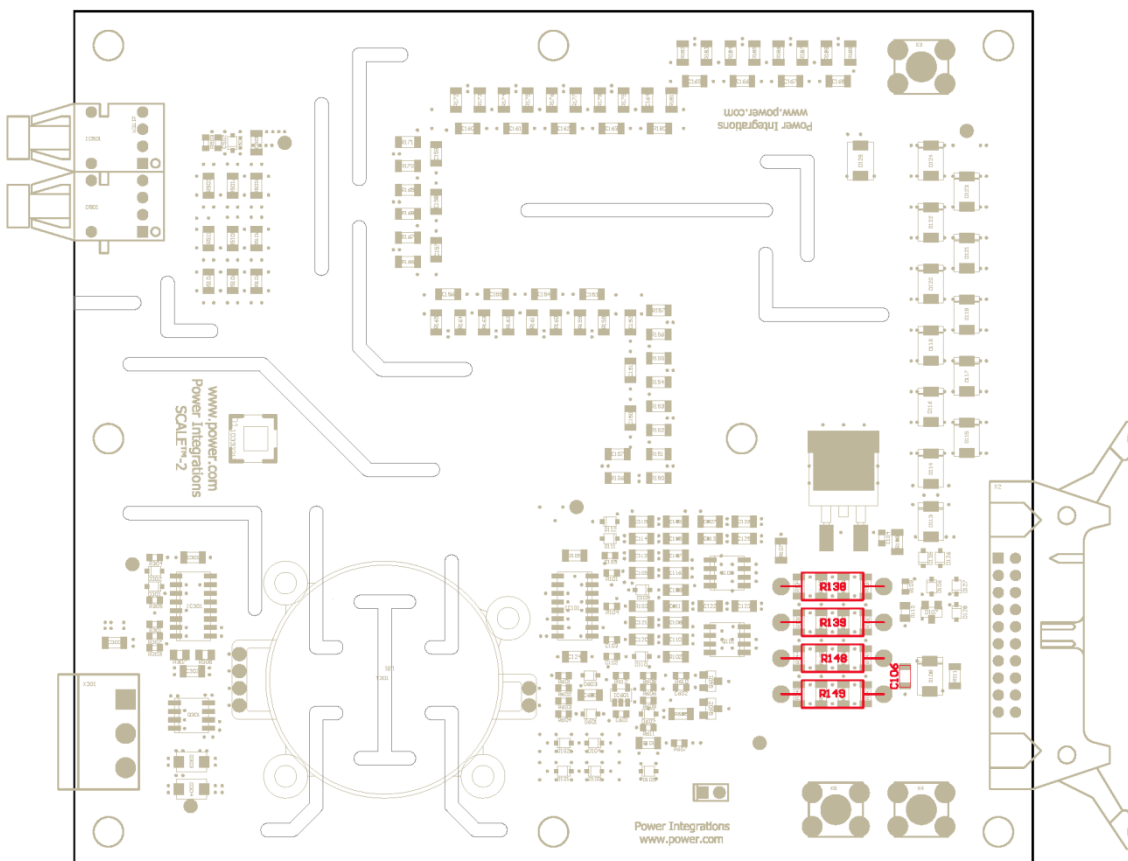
Assembly drawing of 1SP0350V with highlighted gate resistors and auxiliary gate capacitor
